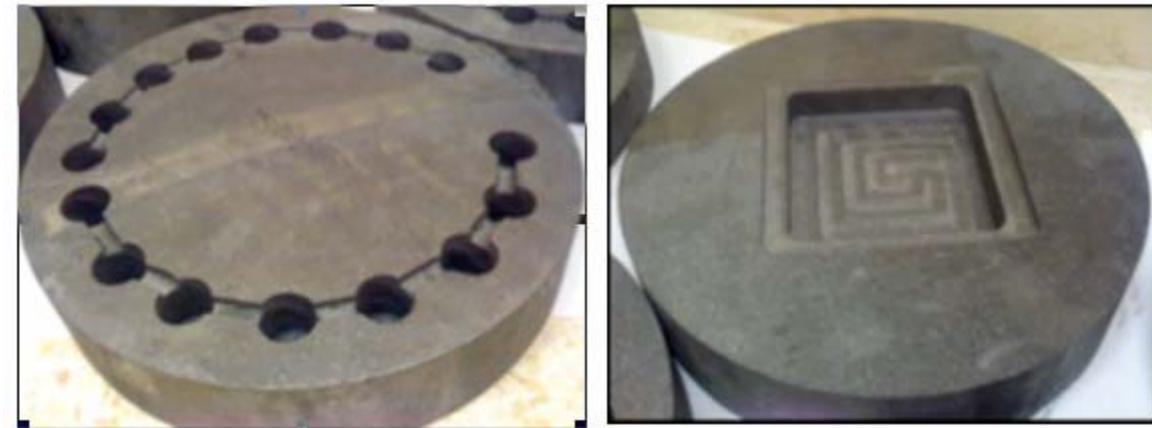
Graphite dies (a) cylindrical specimens and (b) flat plate specimens
